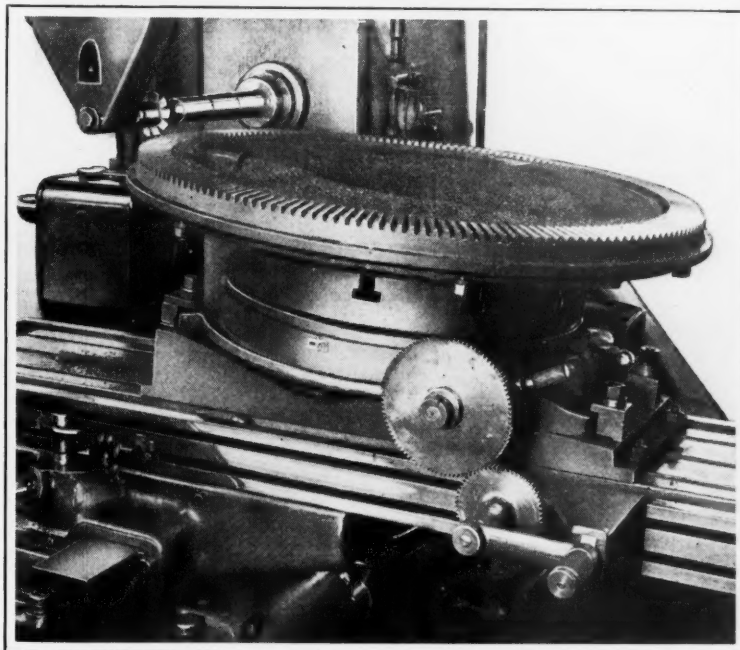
Fixture with Simplified Indexing Device for Milling Teeth in Bevel Ring Gears
